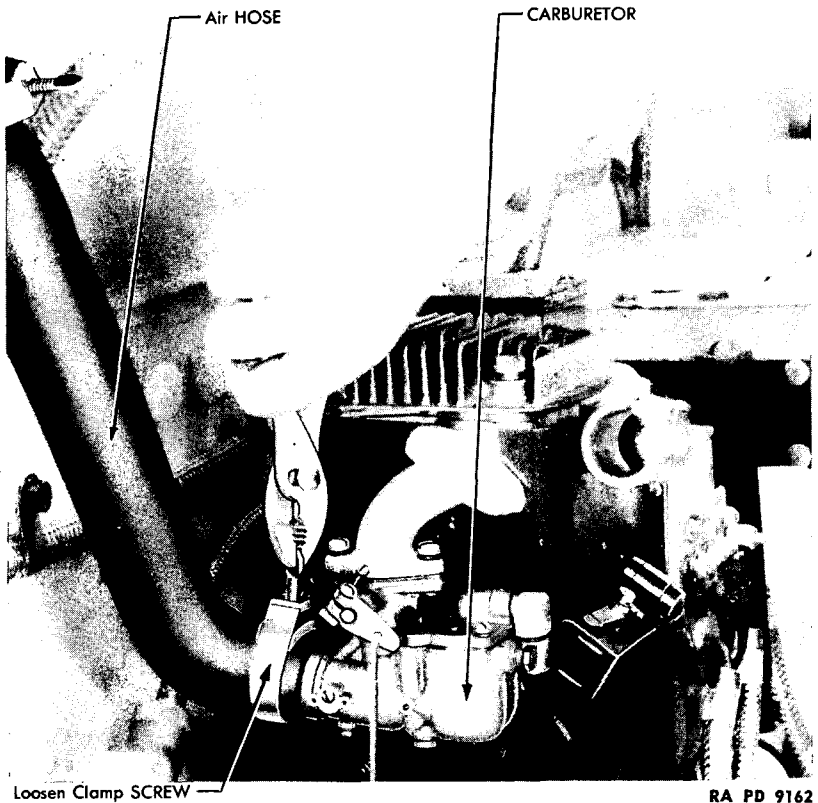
Removing Air Cleaner Tube from Auxiliary Power Plant Carburetor
